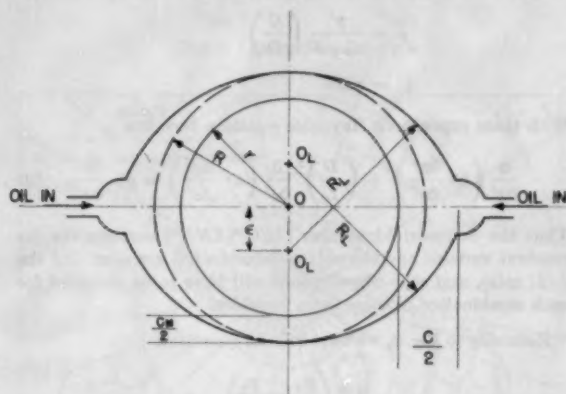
GEOMETRY OF ELLIPTICAL BEARINGS
